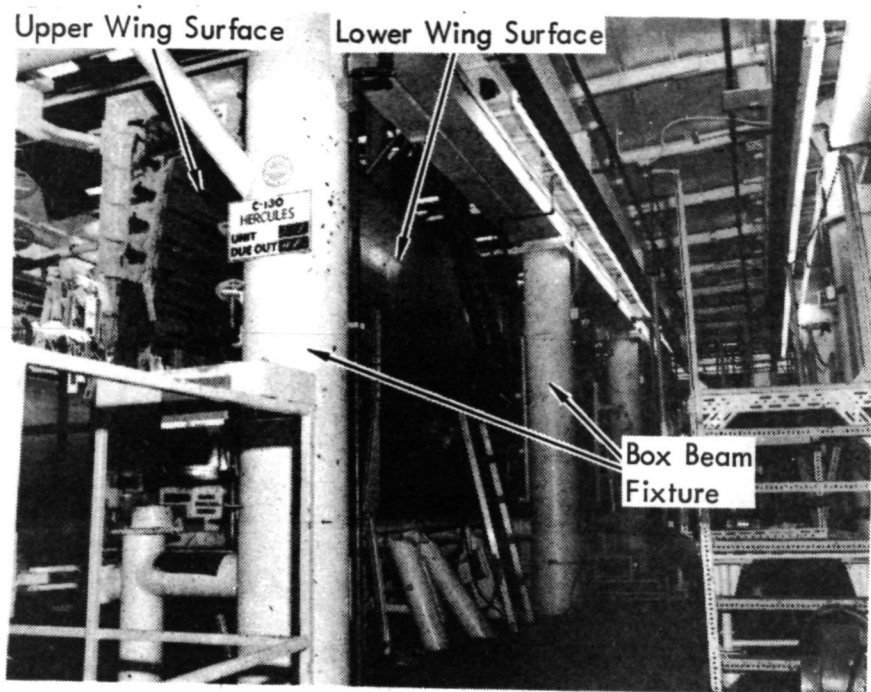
TEST ARTICLE IN BOX BEAM FIXTURE
